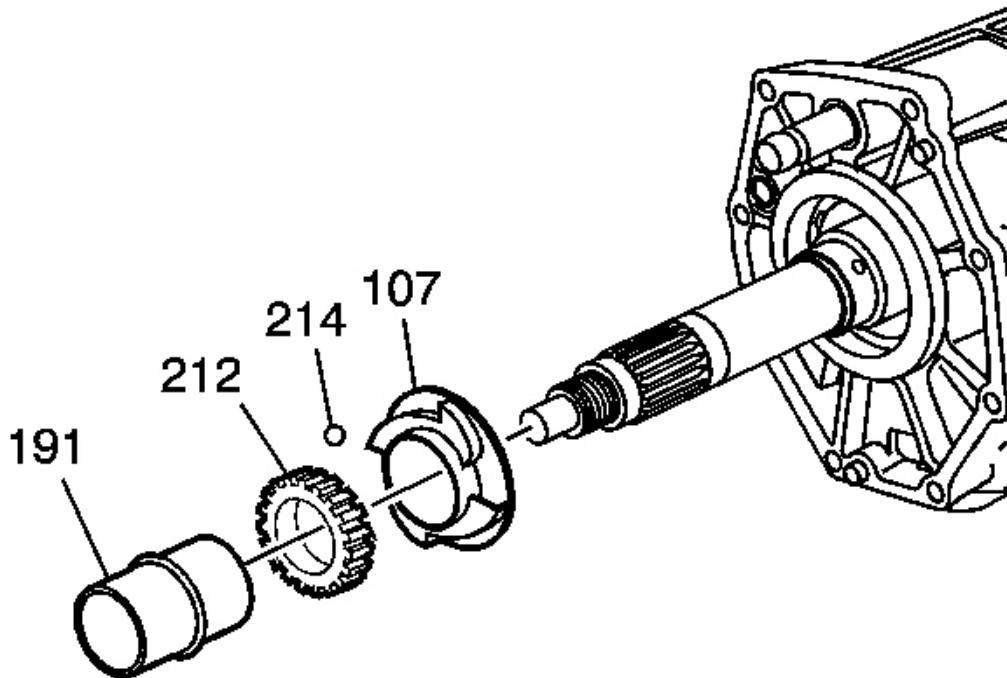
View Of Vehicle Speed Sensor Drive Gear, Spacer, Locking Ball & Main Shaft Bearing Oil Slinger
